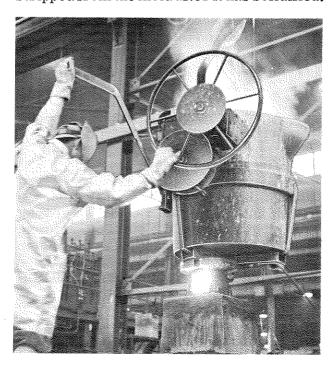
Molten Metal Being Teemed from Ladle into an Ingot Mold.
